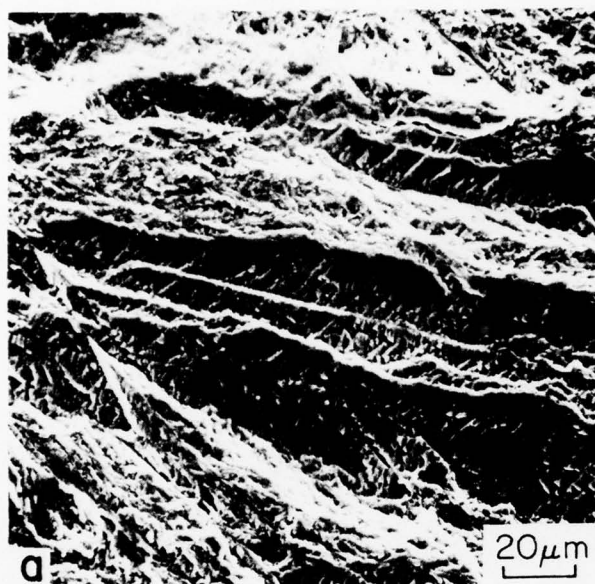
Fracture surface of Condition 5 tested at  $R = 0.3$  in dry air.
